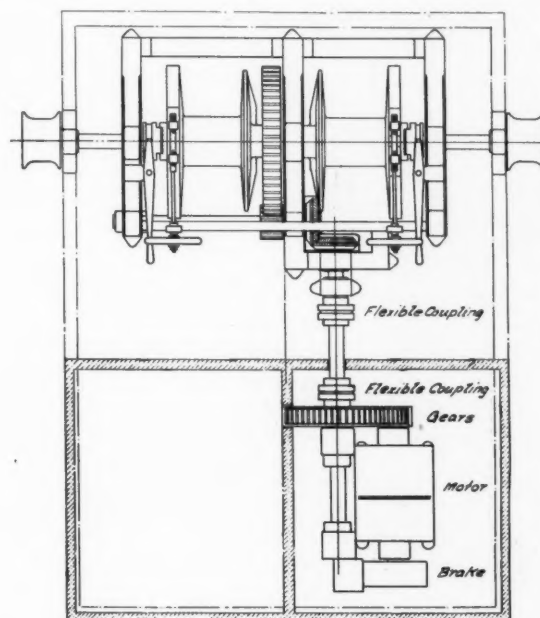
A good electric drive arrangement. The motor shaft is parallel to the vessel's keel; the intermediate shaft has two flexible couplings; speed reduction is by spur and bevel gears.
